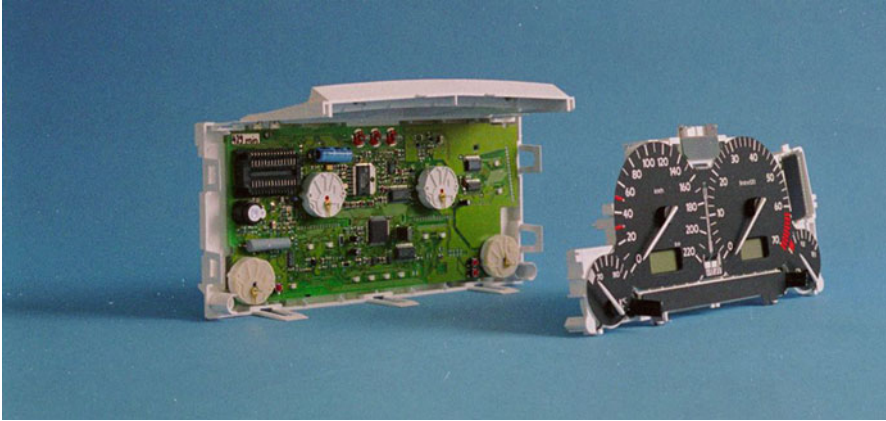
Exploded view of the mechanical instrument cluster of the Golf 3. *Left*, ECU with stepper motors; *right*, dials and displays
